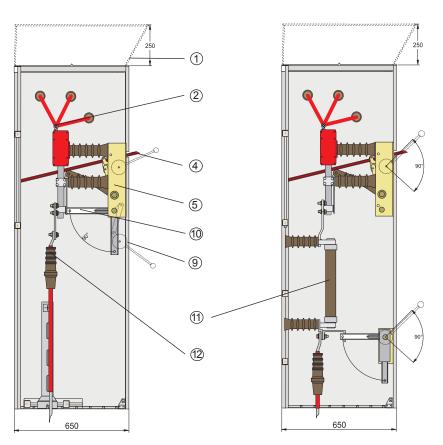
Side view of cable feeder panel FK24-756519-27 With switch disconnector H27 EK
